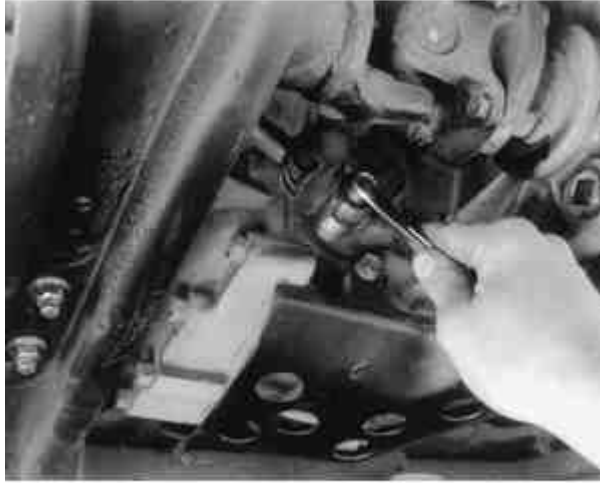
After removing the hold-down bolt remove, the transfer case lever
